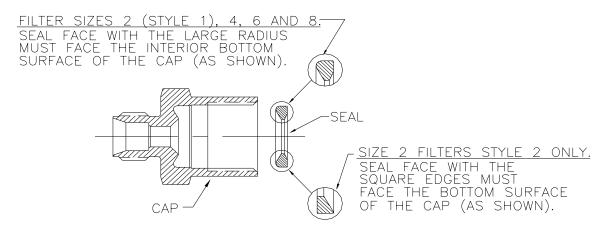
Proper Assembly of Seal in valves purchased after July 1, 1993
